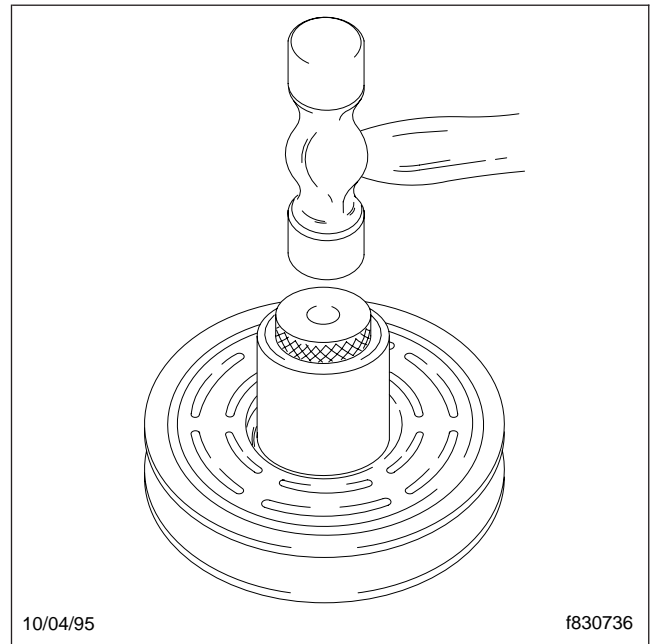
, Drive the Pulley Down Against the Front Housing Step.
